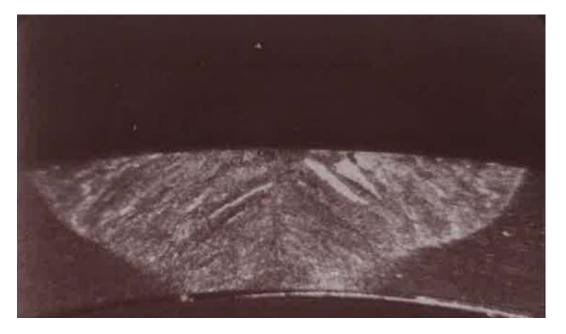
A metallurgical mount of the weld cross-section showed that the 1.00" elbow was manufactured by a TIG (GTAW) welding process. TIG welding is the most commonly used method of welding in tube manufacturing, but it is an older less robust process than is laser welding, resulting in a wider weld bead and larger heat affected zone. This weld bead shape is common in TIG welded tubes.
